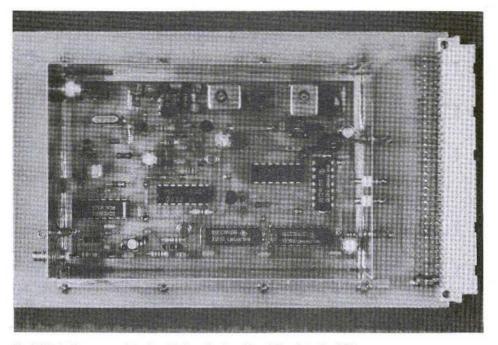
The bottom cover of the tin-plate housing is soldered directly to the PCB
